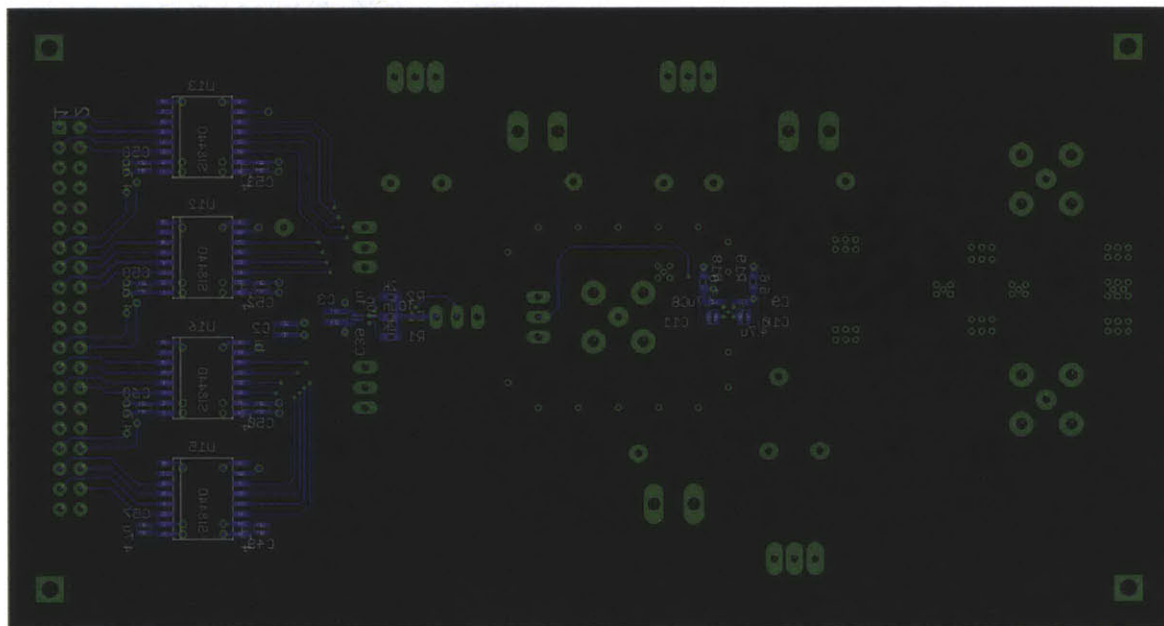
Outphaser PCB bottom layer copper/silkscreen
